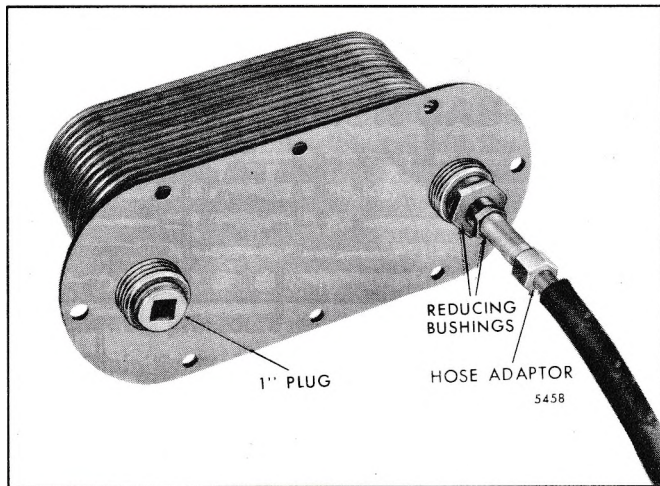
Oil Cooler Core Prepared for Pressure Test
